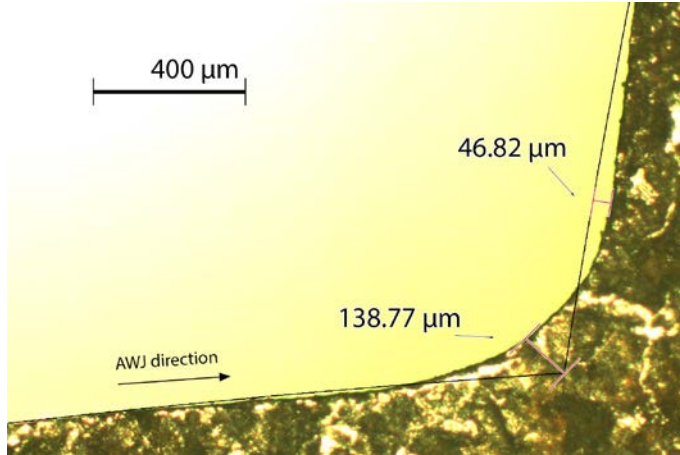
Figure I. Bottom geometry, feed rate 11 mm/s, undercut right side, gear B
